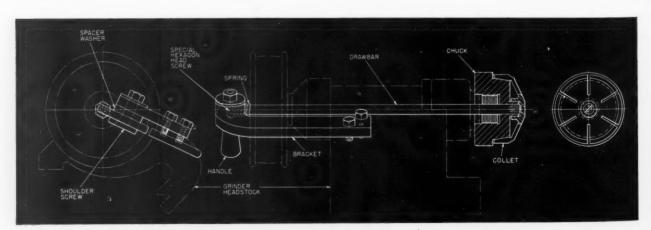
Special spring chuck employed in a cylindrical grinder for grinding the tapered outside diameter of the molded plastic bushing shown in Fig. 1
